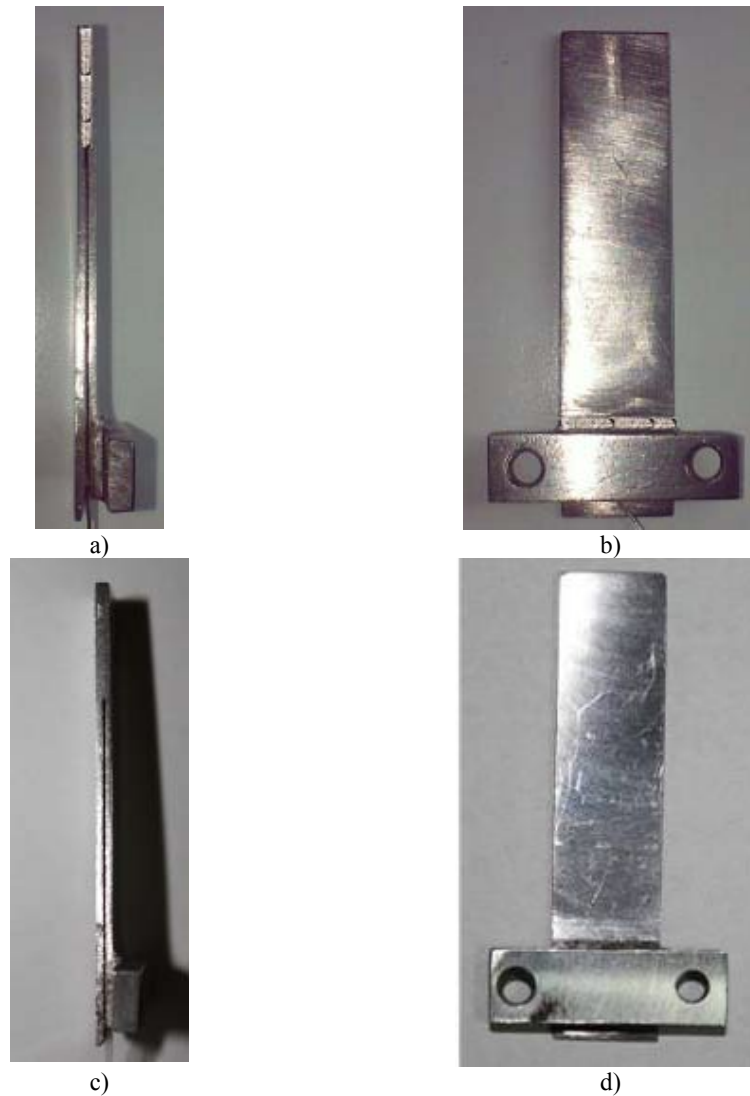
The developed amplification system: manufactured by laser welding (a, b) and manufactured with a wire on a spark erosion machine (c, d).
